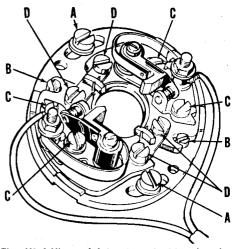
View of later type ignition breaker point assembly. Earlier models are similar. Loosen screws (C) to adjust breaker point gap.
